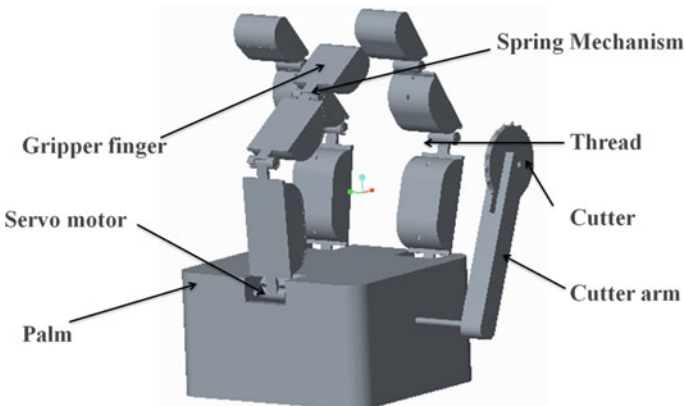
Three-dimensional model of the pineapple harvesting gripper
